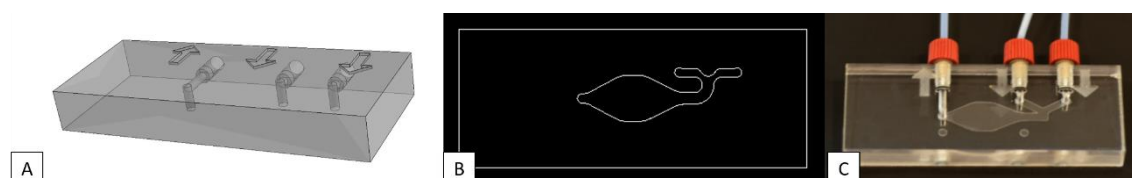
, Thermalization chip. PMMA block 3D drawing(A), Thermalization chamber 2D drawing(B), Full chip assembly example(C)
